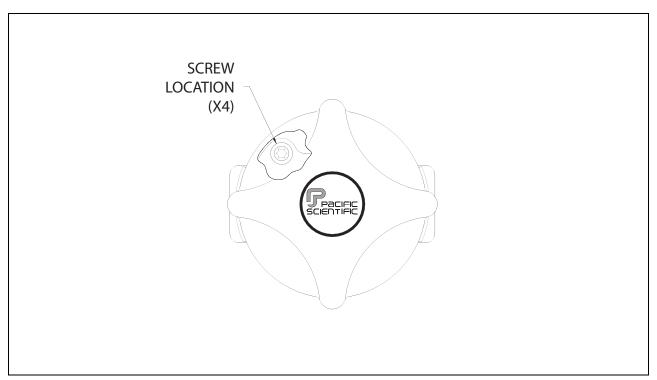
PNR 1111548-01 Rotary Buckle Screw Location
